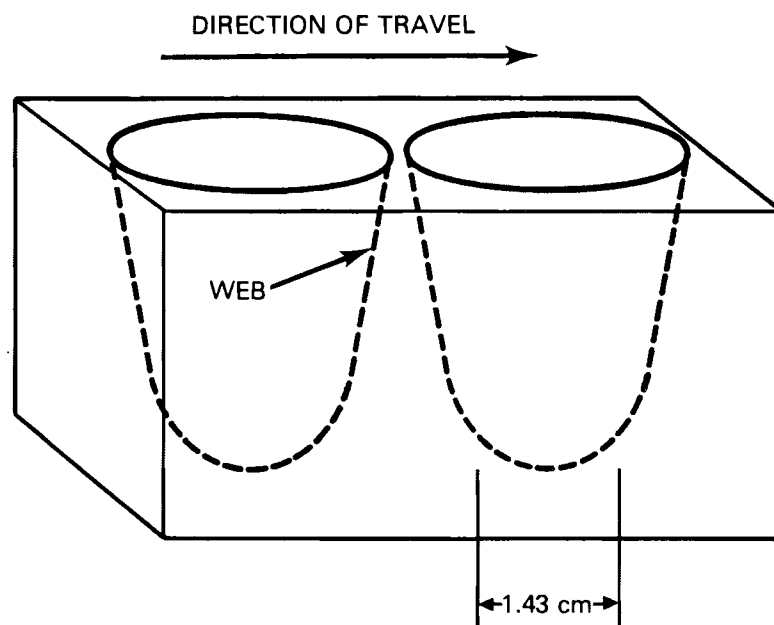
Mold Design for PNL Vibratory Marble Machine
